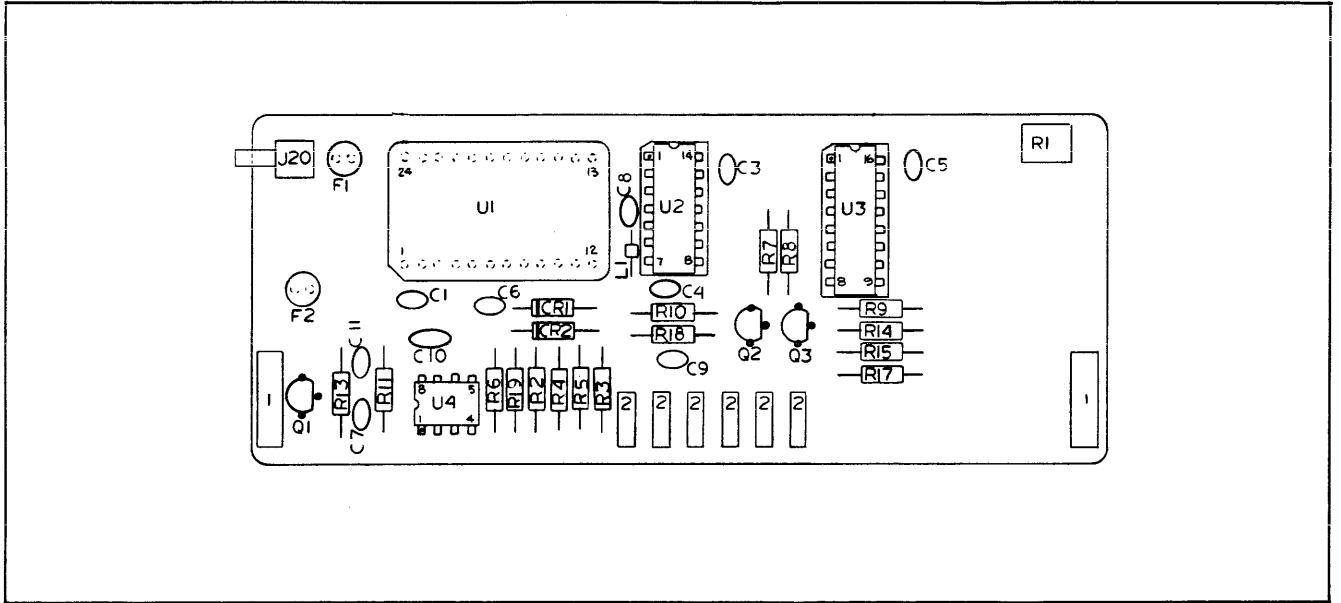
A14 1000 MHz Prescaler PCB Assembly
